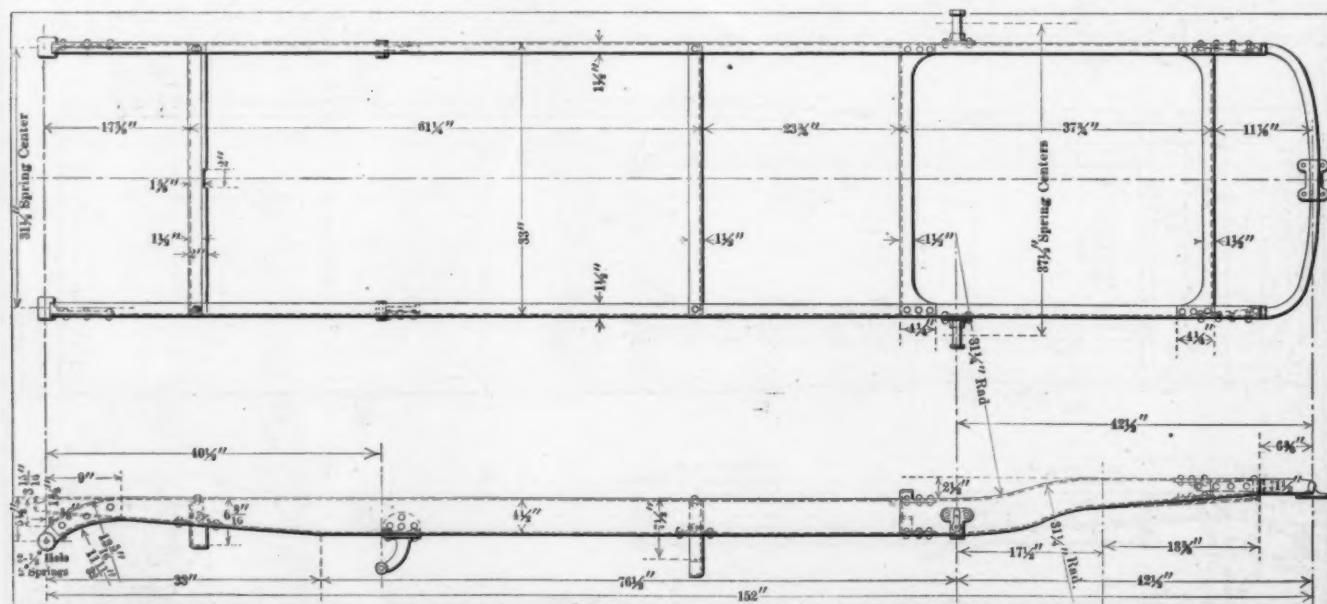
Corbin frame in plan and elevation, with straight front, rear kick-up and supports for platform springs.
